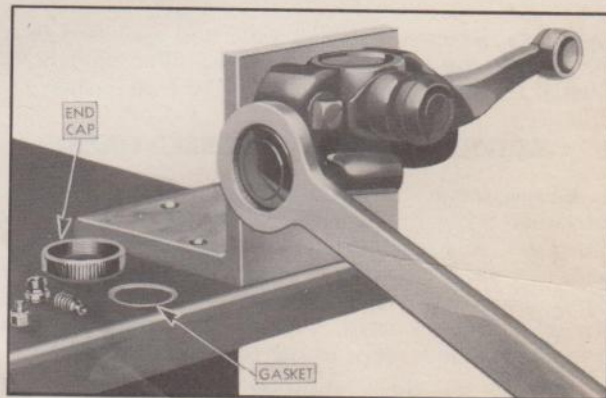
Removing End Caps from Double-Acting Shock Absorbers
